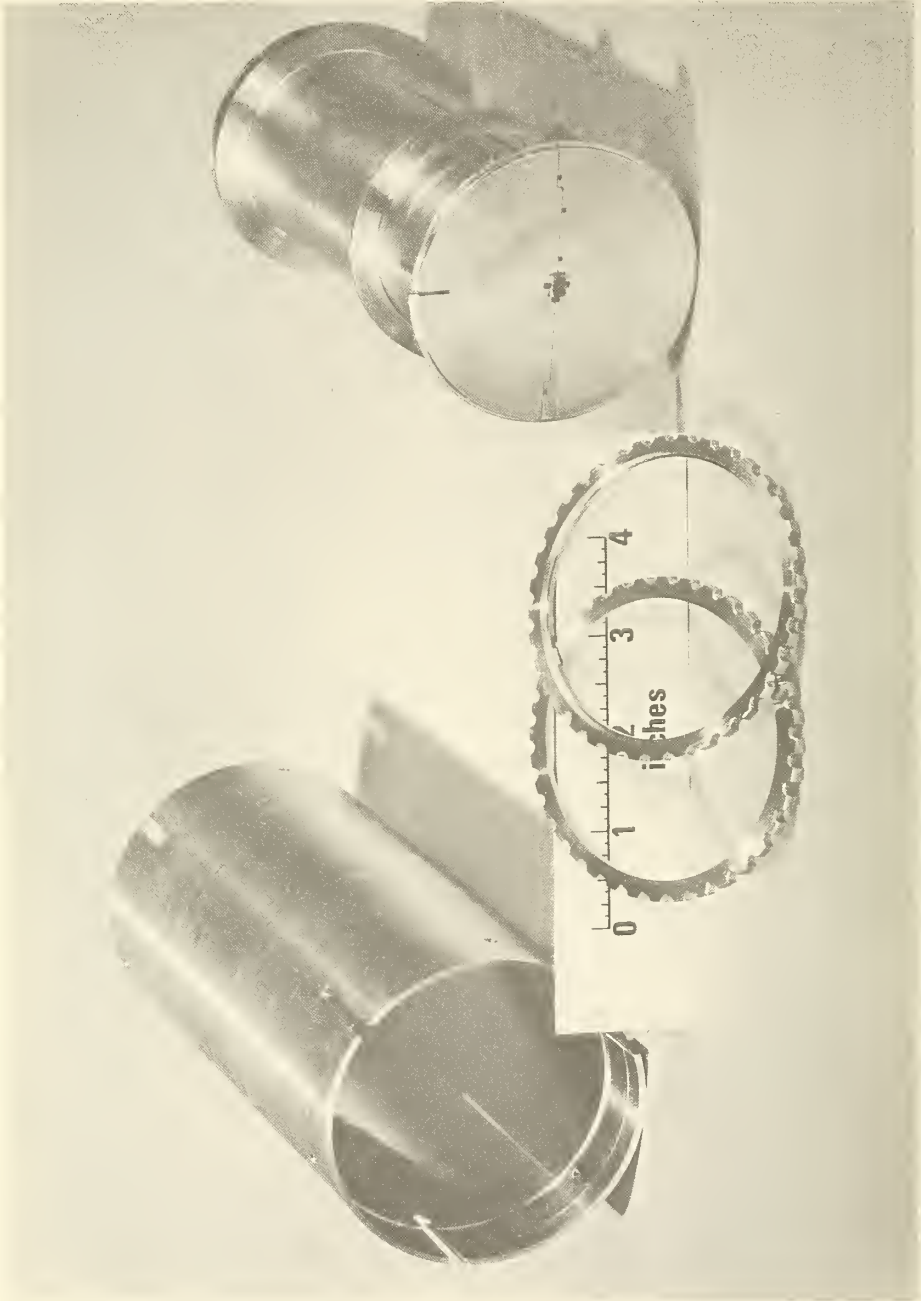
Exploded View of the Inconel Heat Distributor, Sleeve, and Locking Rings.
